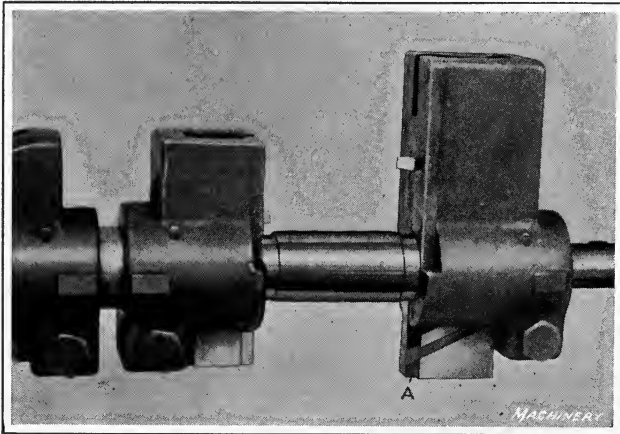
Close-up View of One of the Facing Bars in Fig. 45, showing Grooves used in feeding Cutter across the Surface
